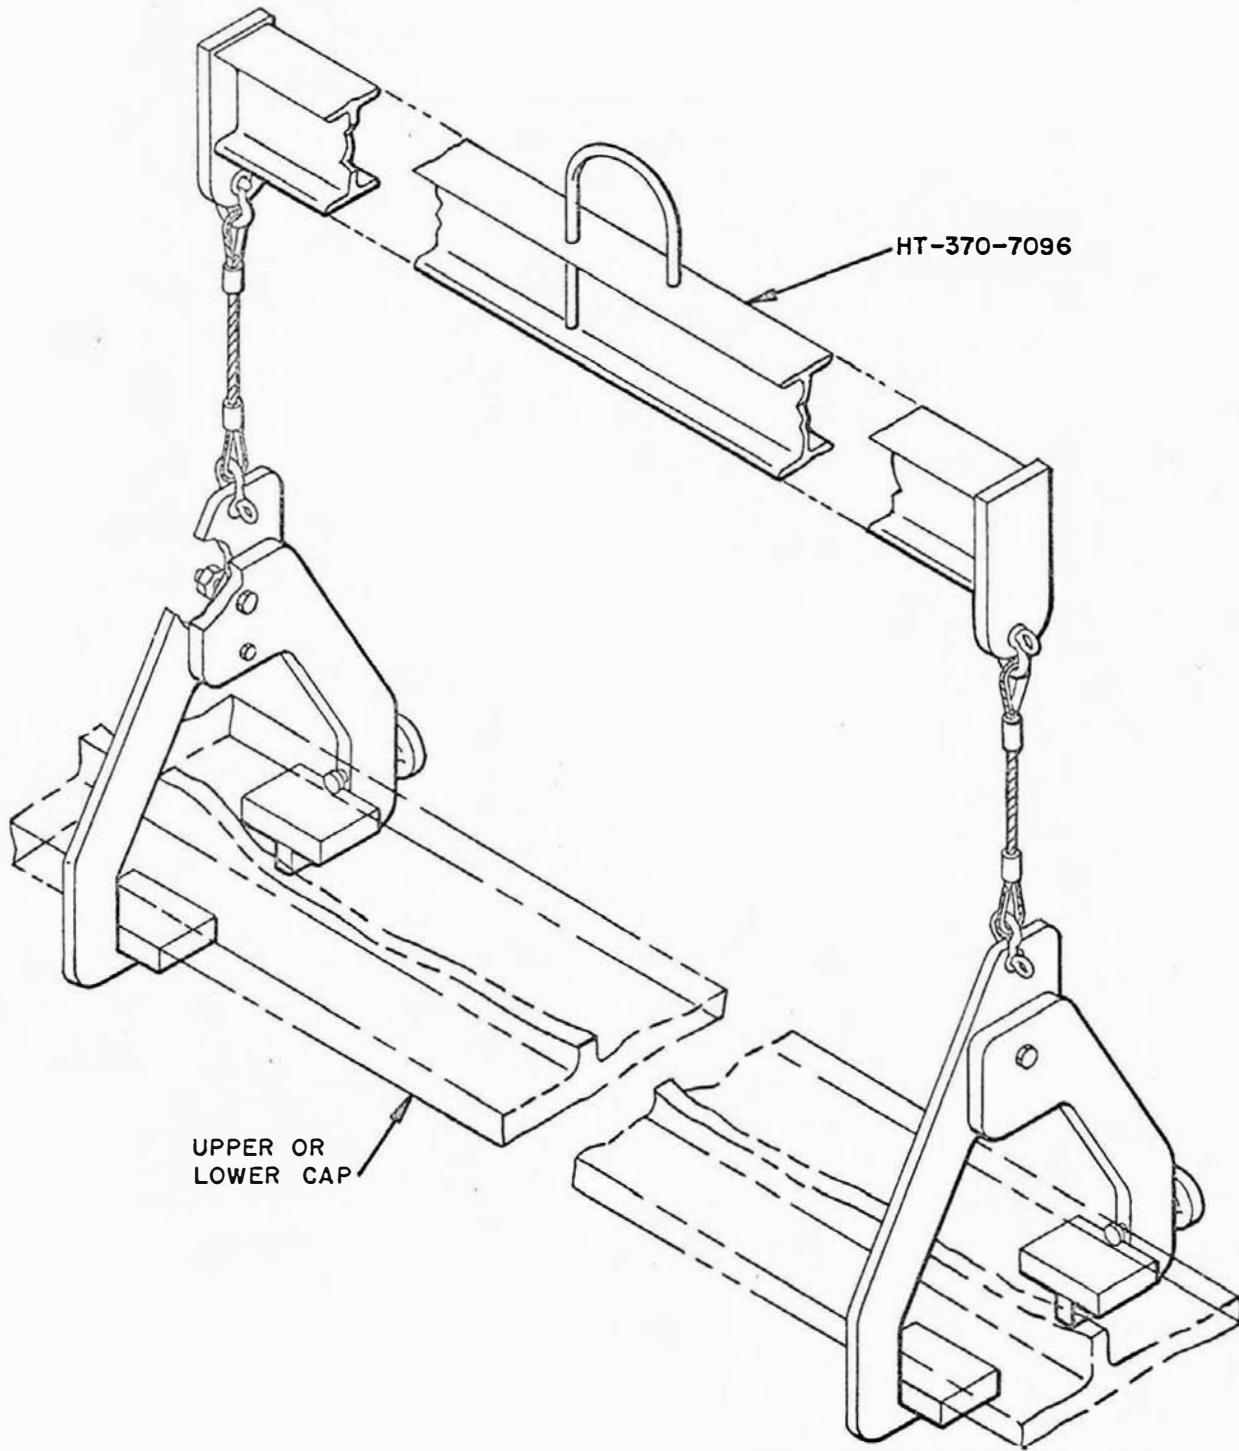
Center Engine Support Upper and Lower Caps Hoisting Tool
